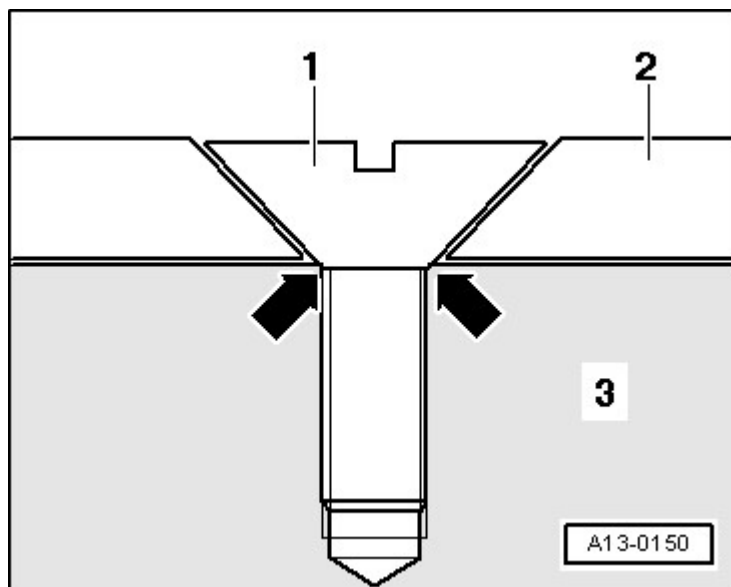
Identifying Attachment Points, Countersunk Screws, Crankshaft & Sensor Wheel
